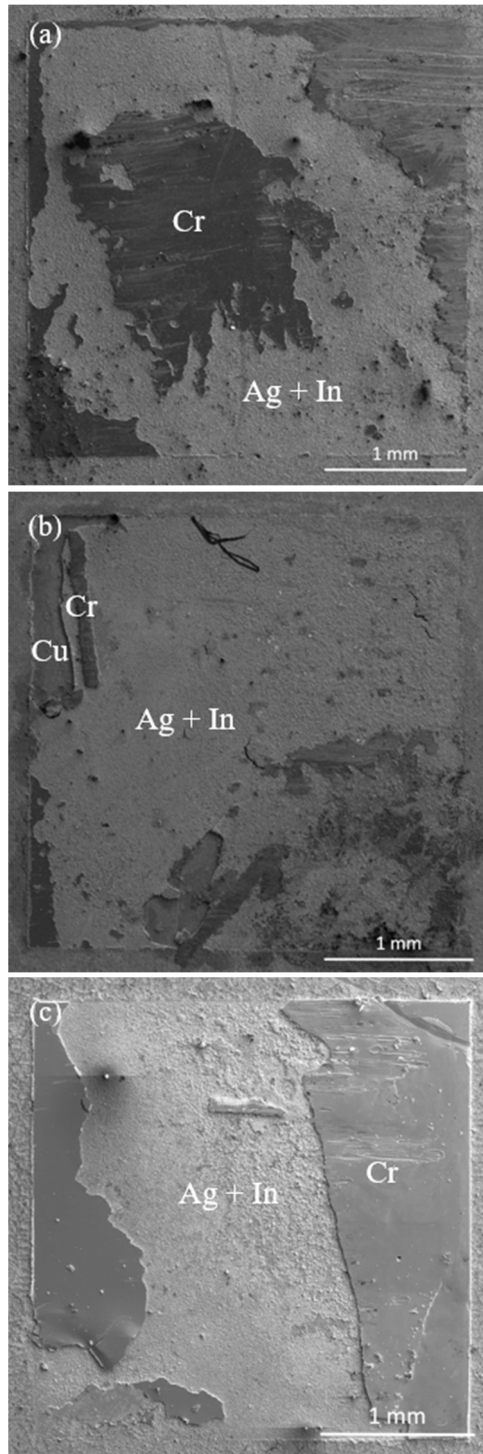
The overall view of the fracture surface on the Cu substrate after die shear test (a) Design I (b) Design II and (c) Design III
